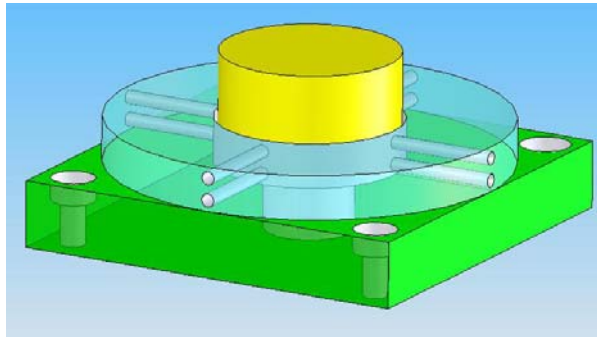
CAD drawing of workpiece mounted on the mounting plate
